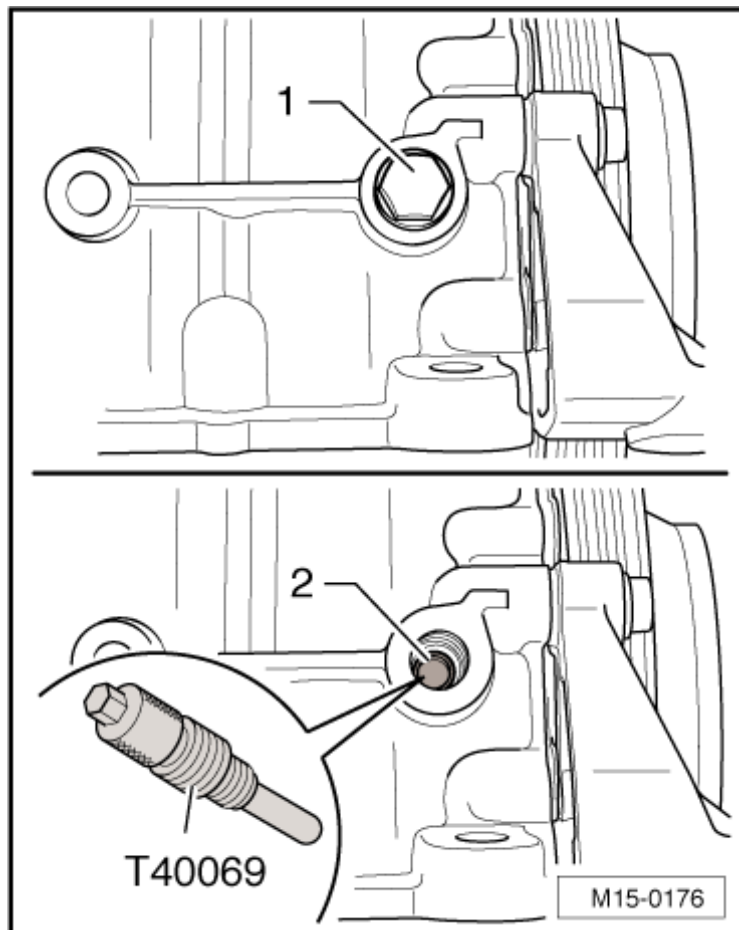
Identifying Crankshaft Must Not Be Rotated Out Over TDC Marking
